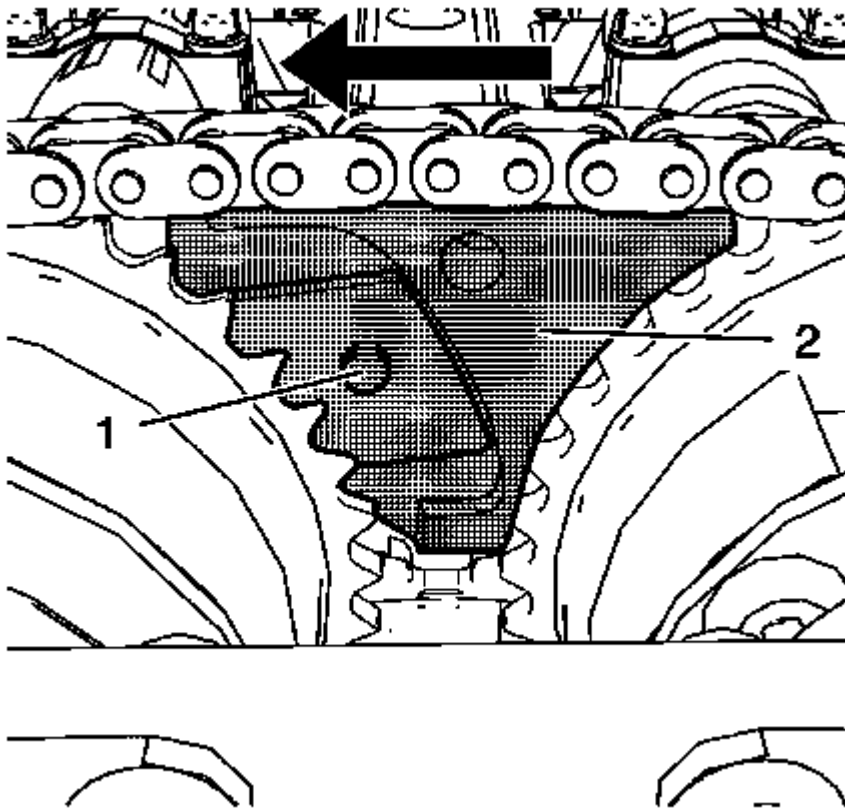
Intake Camshaft Sprocket Gearing And Special Tool
